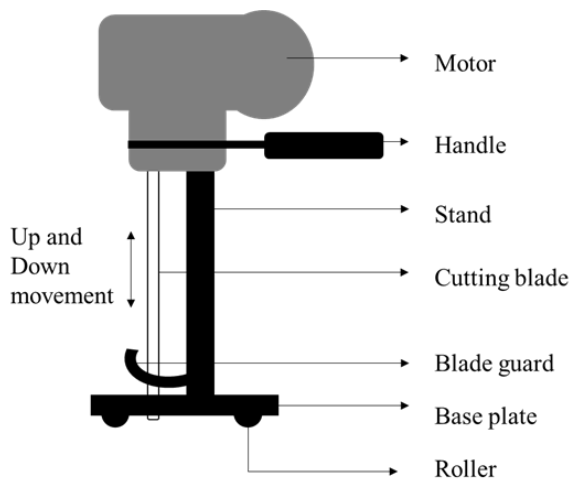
Straight knife cutting machine3.5.4 Basic Components of Portable Knives
